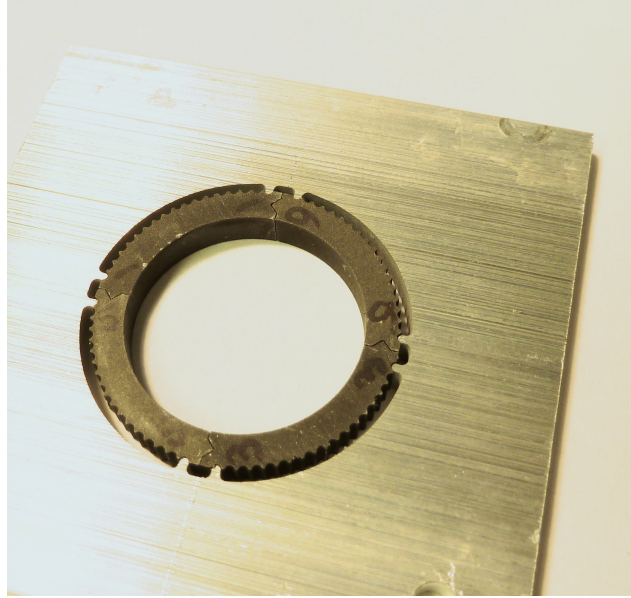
Magnets were assembled into rings using fixtures made by wire EDM; shown here is a ring of outer magnets in its fixture.
